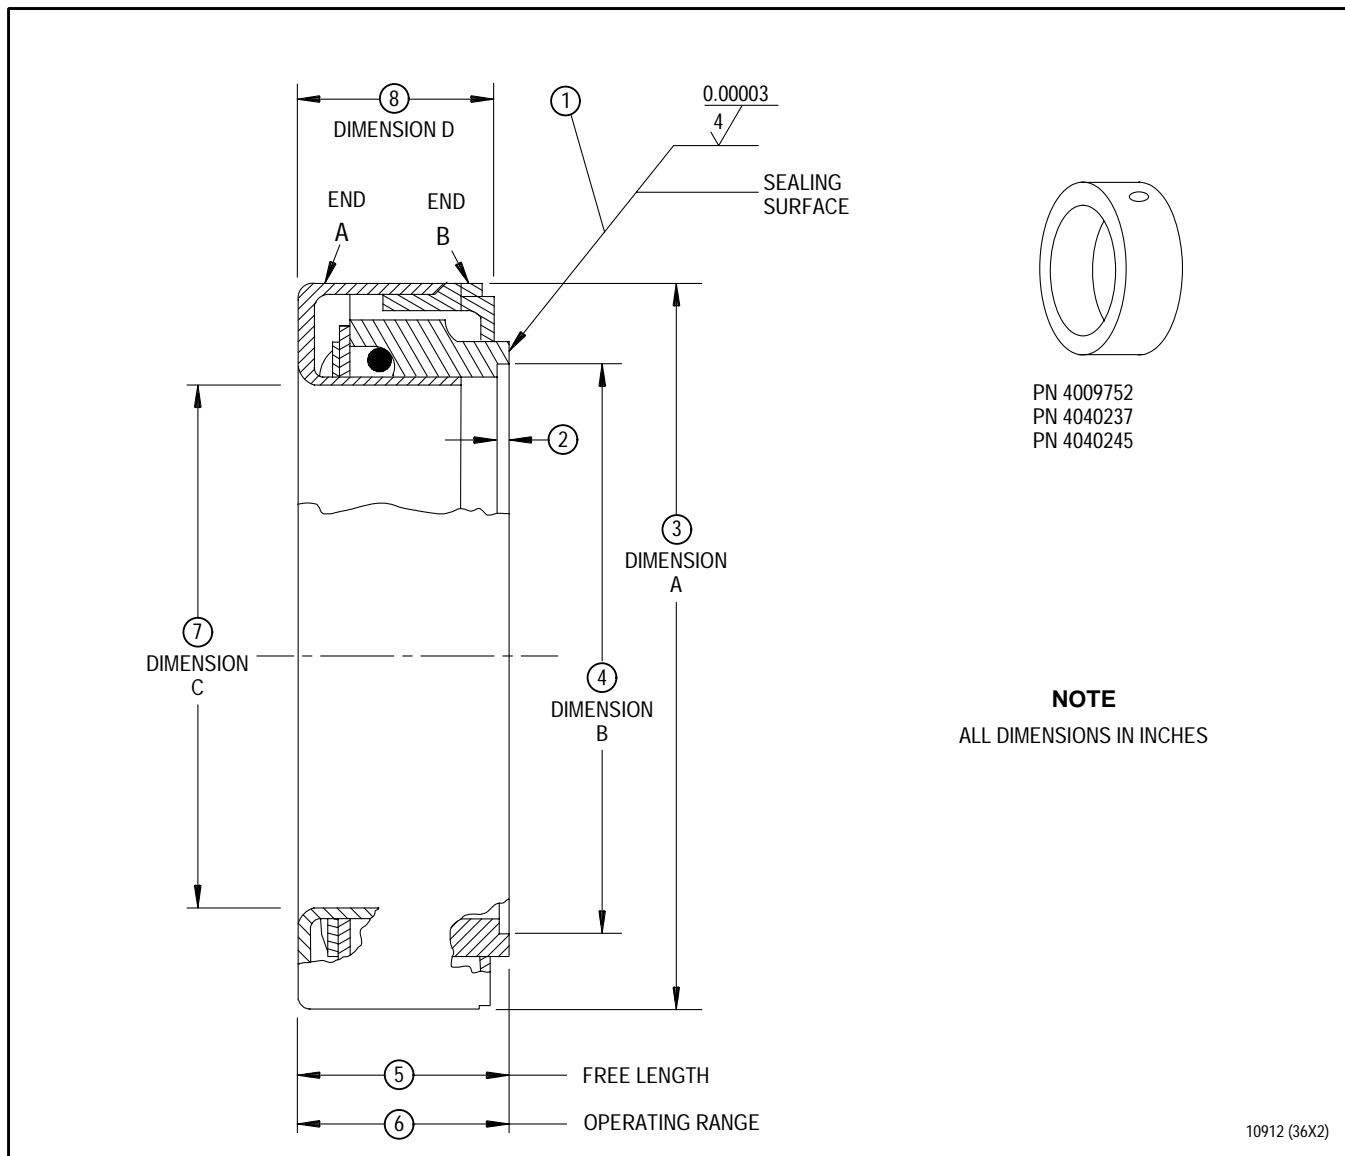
Gearbox Seal Assemblies (PN 4009752, 4040237, and 4040245) - Inspection
